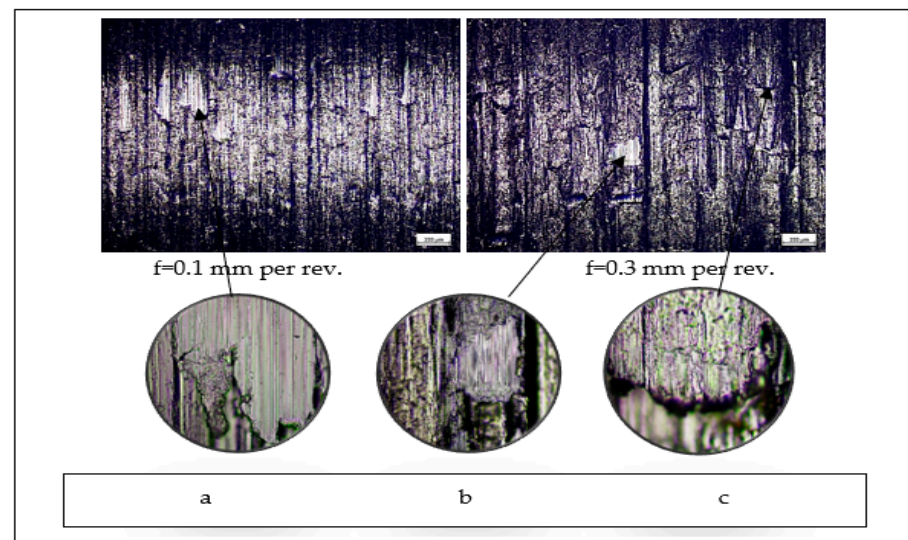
Examples of negative phenomena on the machined surface after turning steel C45 at a feed of $f = 0.1$ mm per revolution. a: $f = 0.3$ mm per revolution (a: spreading of material on the machined surface, b: surface after breakage of the material element, c: crack on the machined surface).
